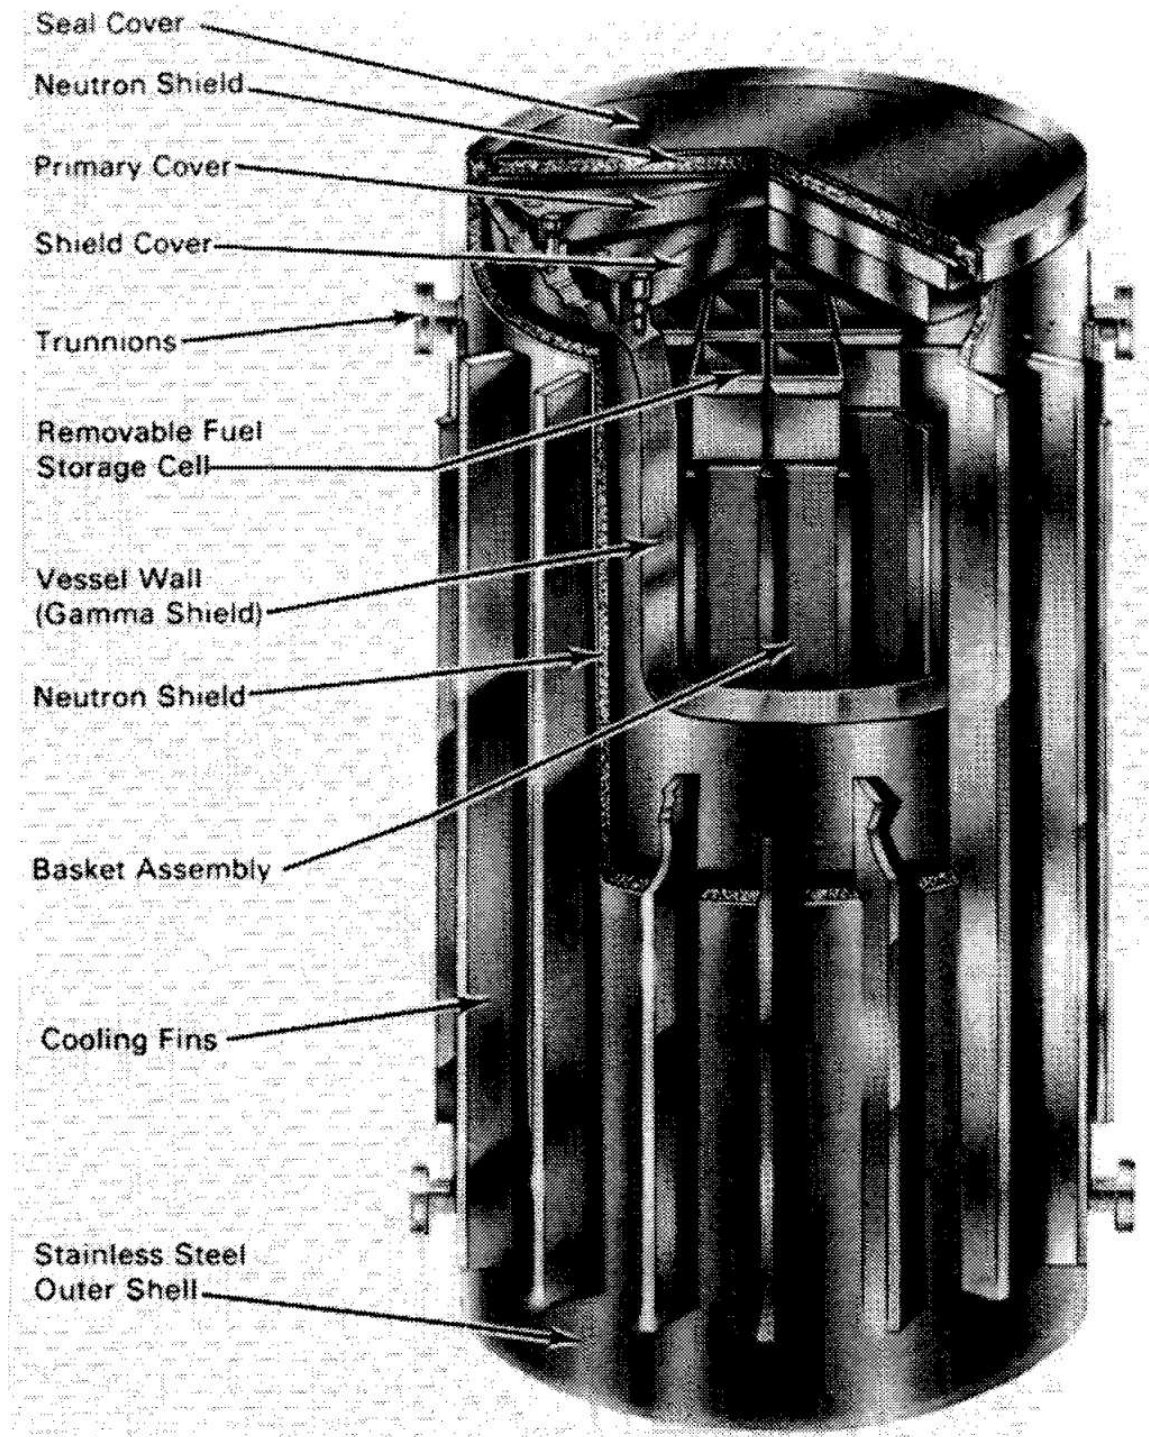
Cutaway drawing of the MC-10 fuel cask [99].
